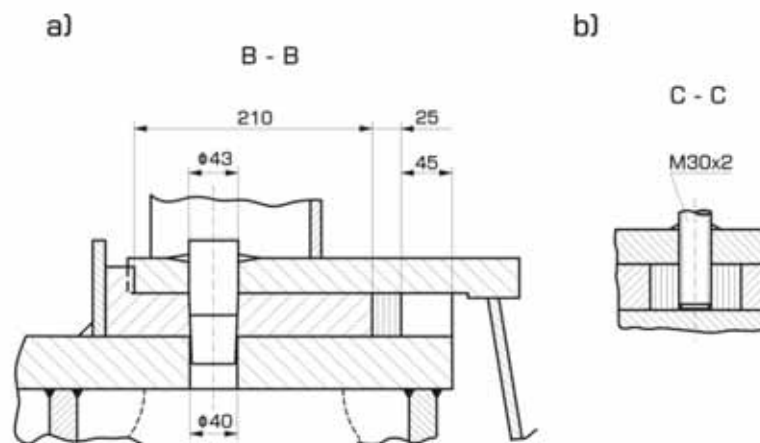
Chock cross sections: a) section B-B showing position and dimensions of the chock hole for the foundation bolt, b) section C-C showing the position of bolt aligning between chocks
